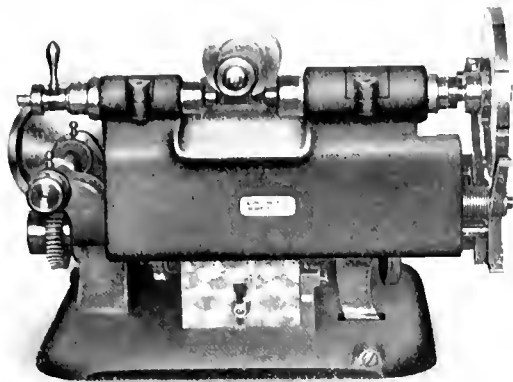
The Sloan & Chace Automatic Precision Pinion-cutter, arranged for taking Three Cuts through Each Tooth.
